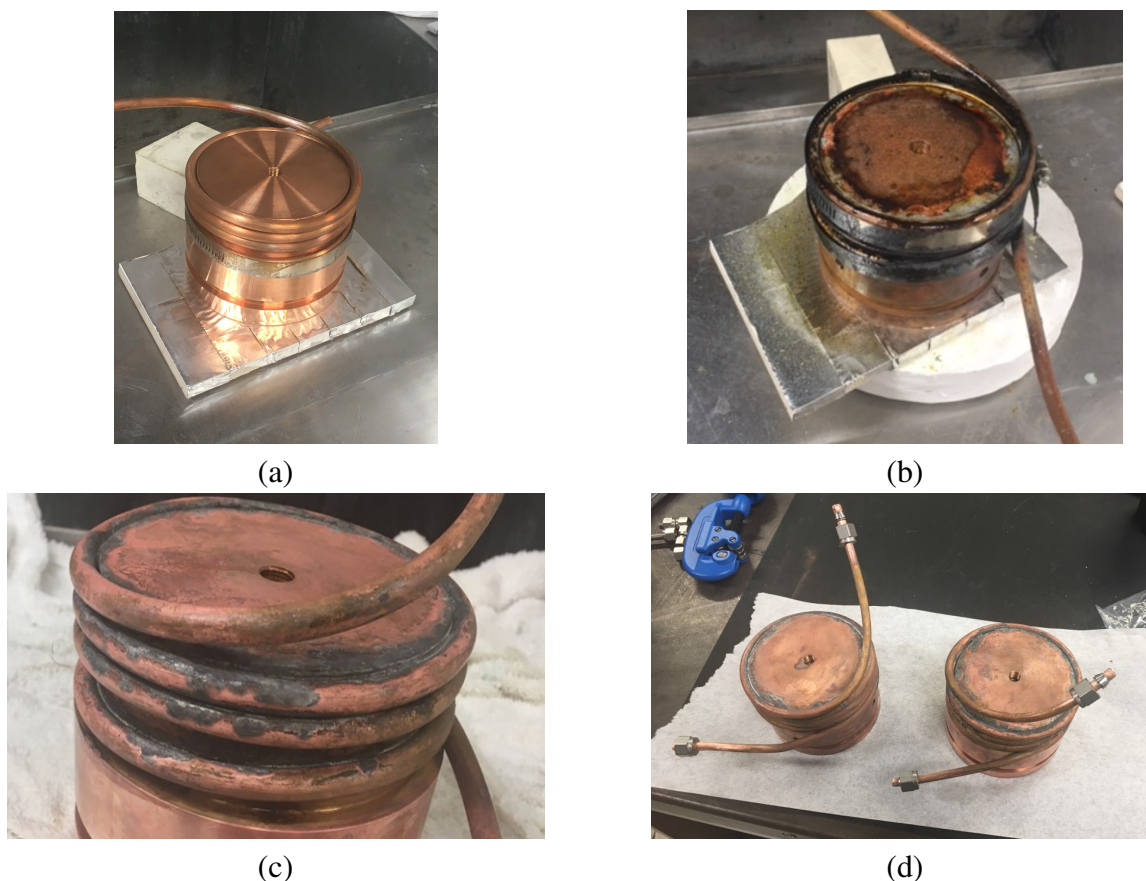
Soldering of cooling lines to copper supports. (a) Fixture for soldering using hose clamps and insulating ceramic piece as a platform. (b) Application of solder to all tubing coils. (c) Removal of hose clamps and cleaning performed sequentially with isopropyl alcohol, vinegar, and water baths. (d) Finished copper support pieces.
